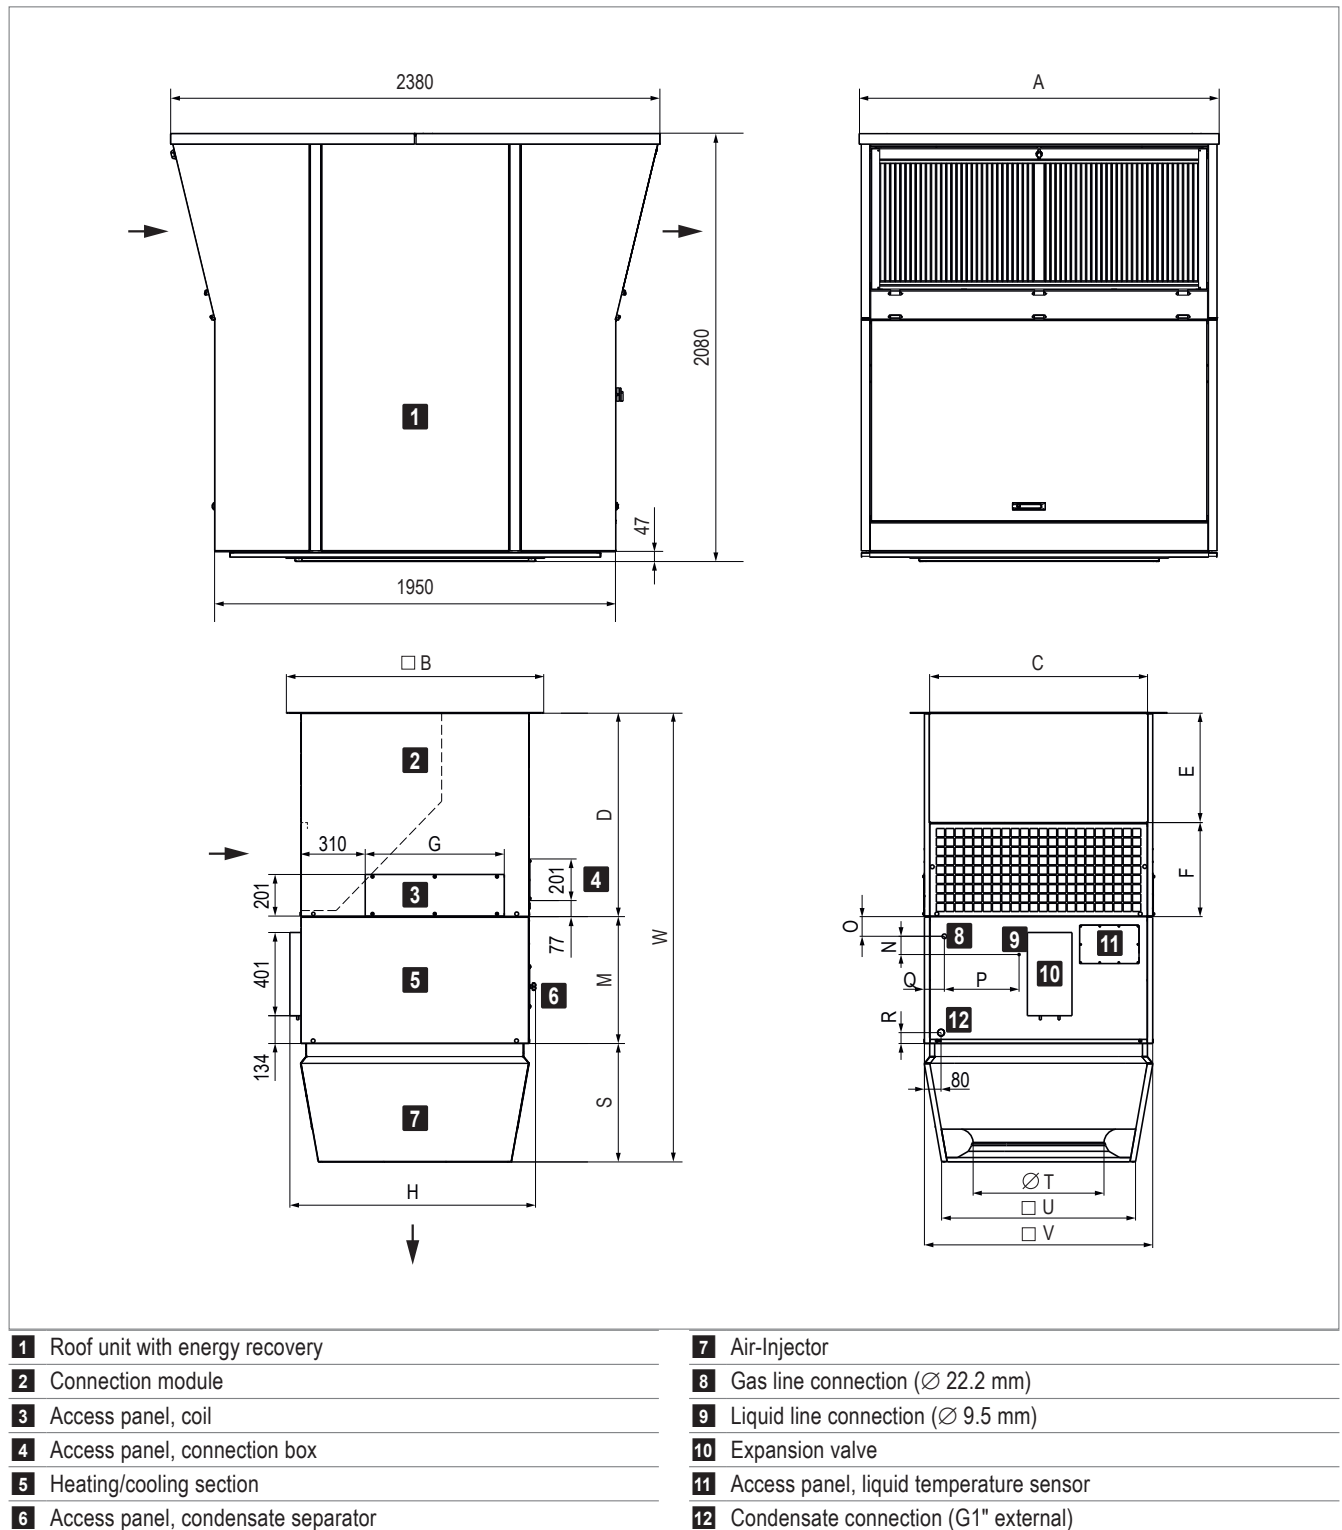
RoofVent® RP-6-K, RP-9-K dimensional drawing (dimensions in mm)
